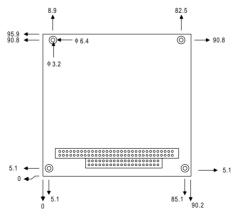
PC/104 module dimensions (mm) (±0.1)
